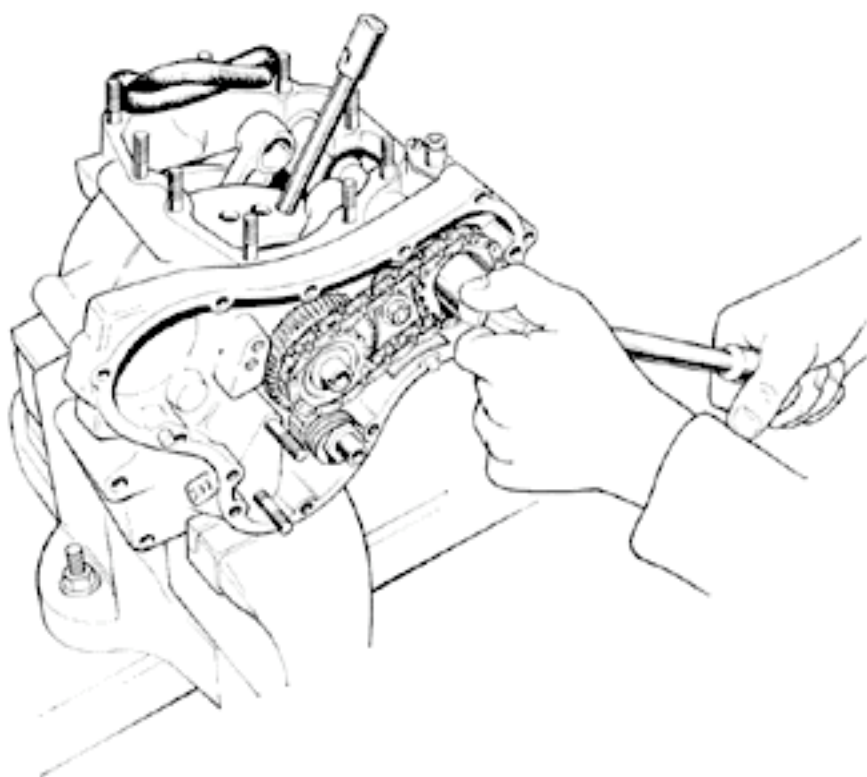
Using a spanner to turn the oil pump drive wheel nut and remove the pump
